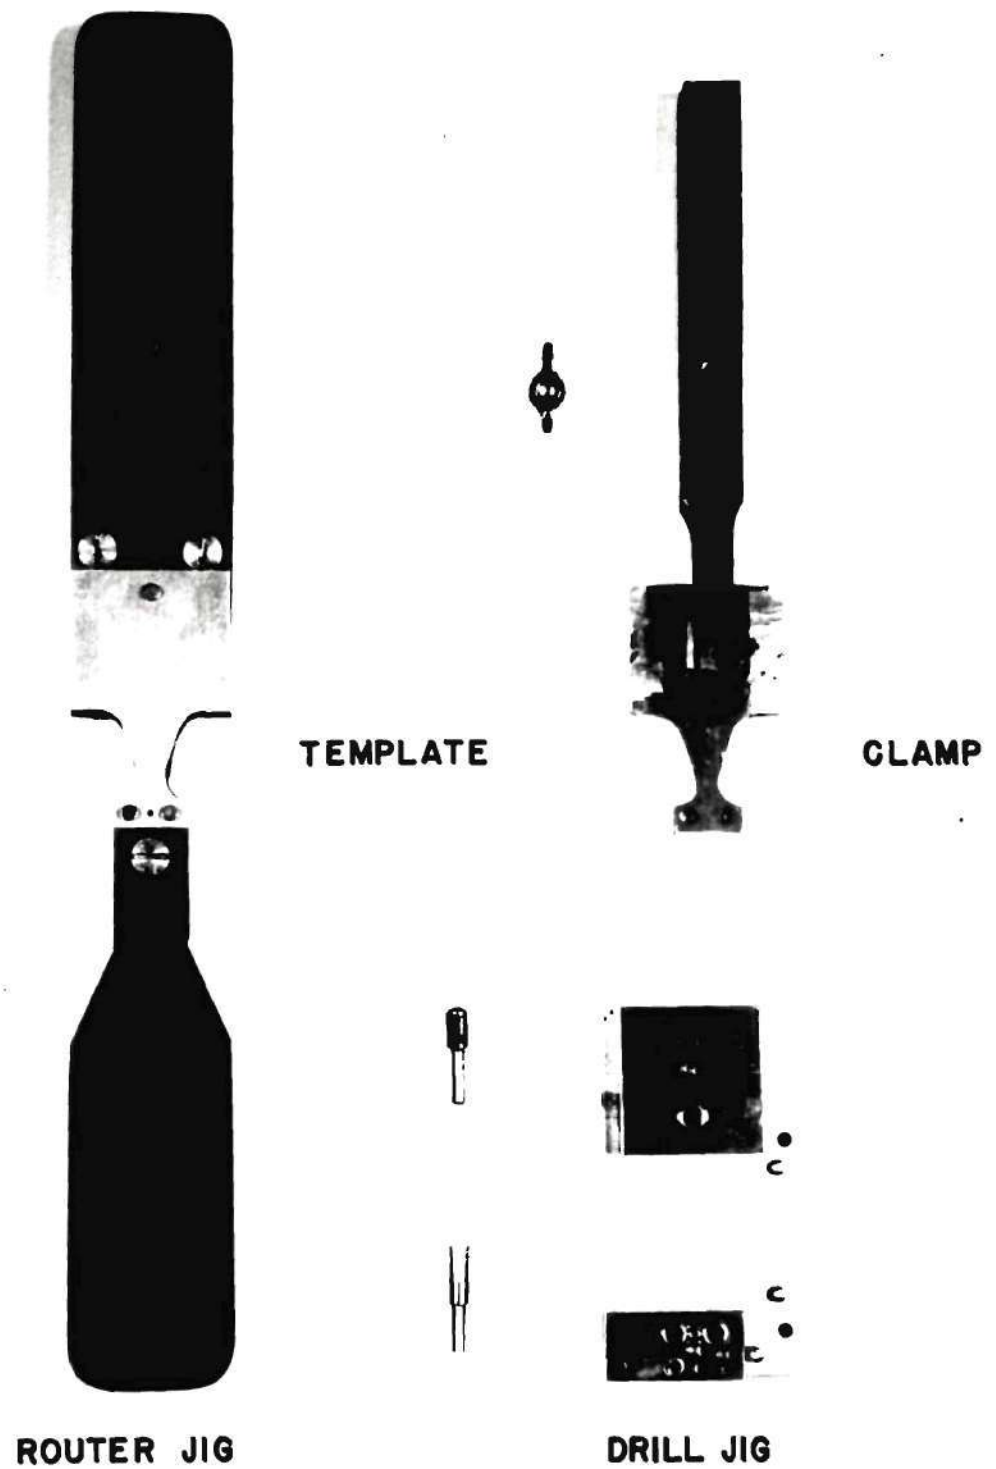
PHOTOGRAPH OF DRILL JIG AND ROUTER JIG
